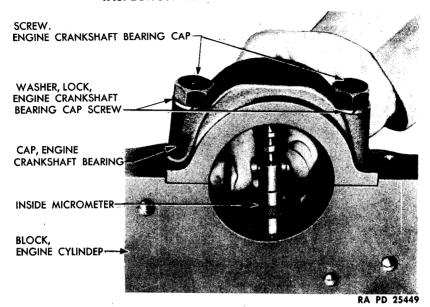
Measuring Crankshaft Bearing Bore Diameter
